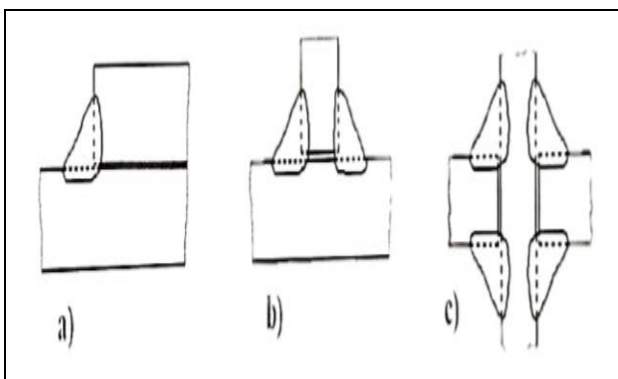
Fillet welds in different joints a) Lap joint b) T-joint c) Cross joint [1]
